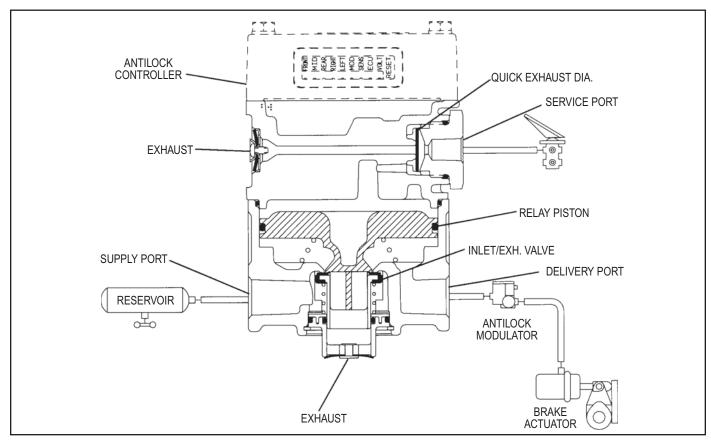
AR-1™ VALVE HOLDING - BALANCED
